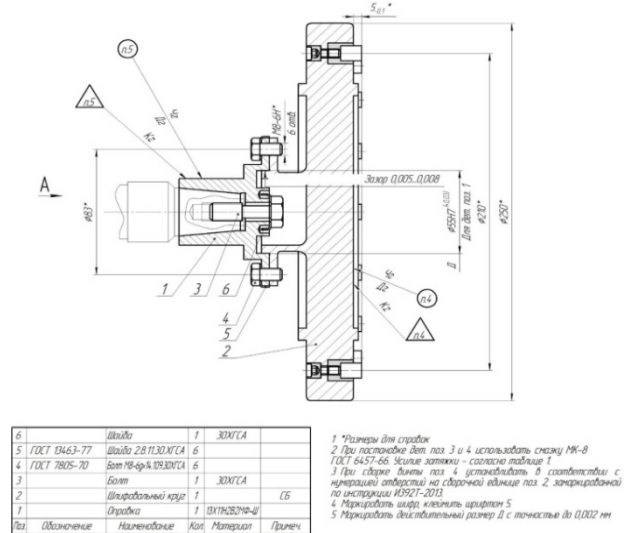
Grinding wheel for ultra-fast grinding with horizontal machining units
